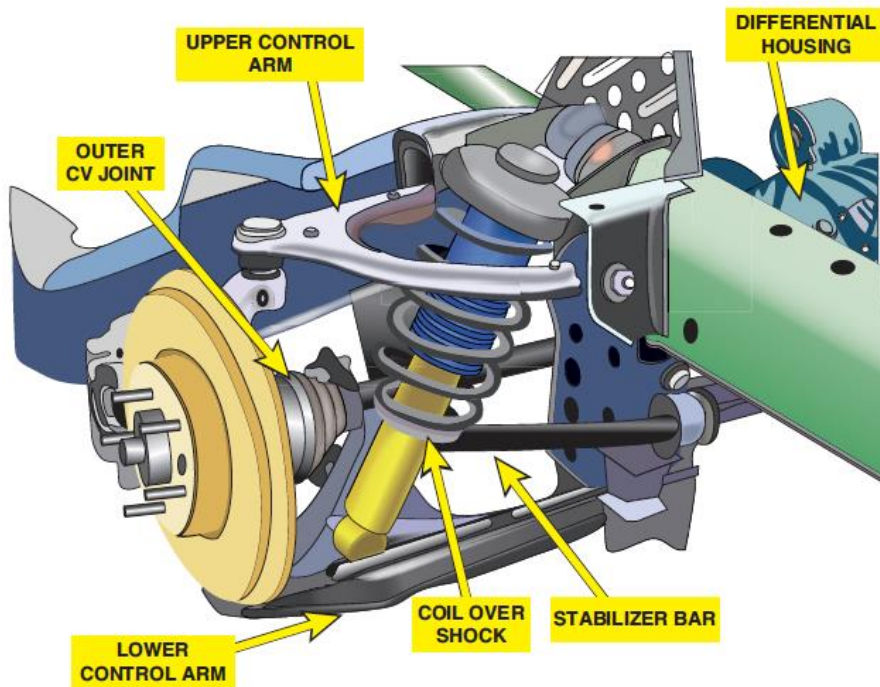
Independent rear suspension. The differential housing is bolted to the vehicle frame.
